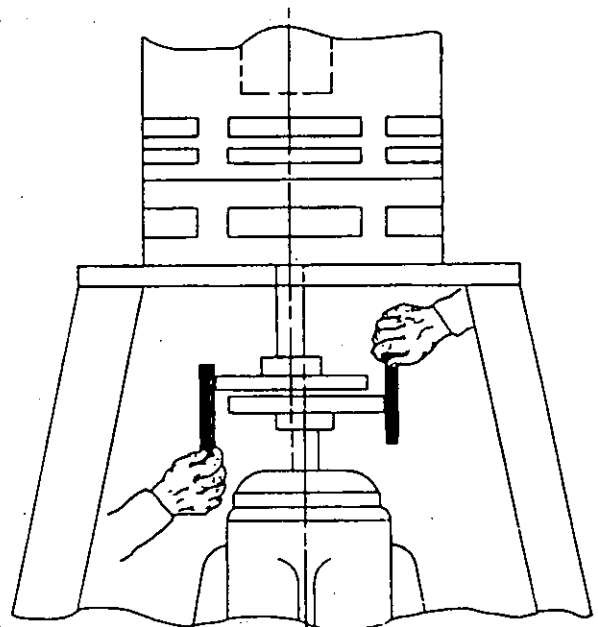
FIGURE IIIb - CHECKING PARALLEL ALIGNMENT
